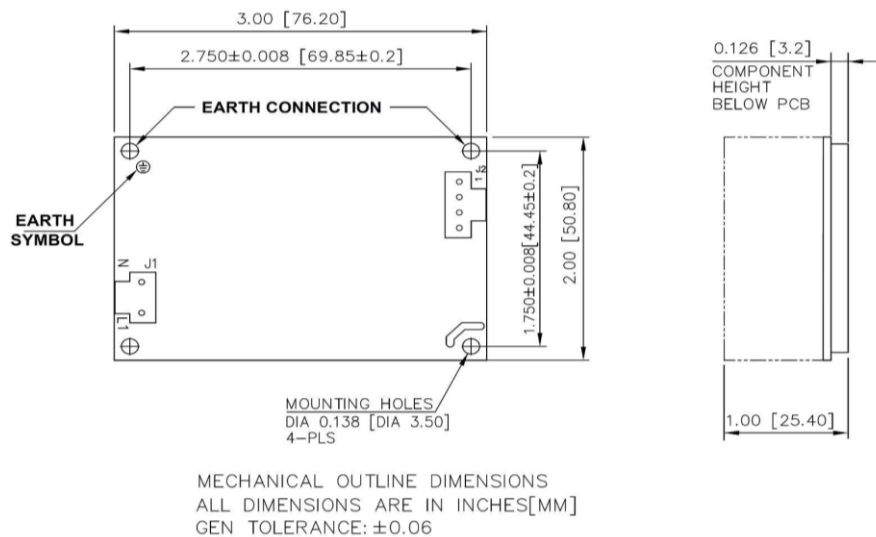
Mechanical Drawing - Molex Header (Option 2)
